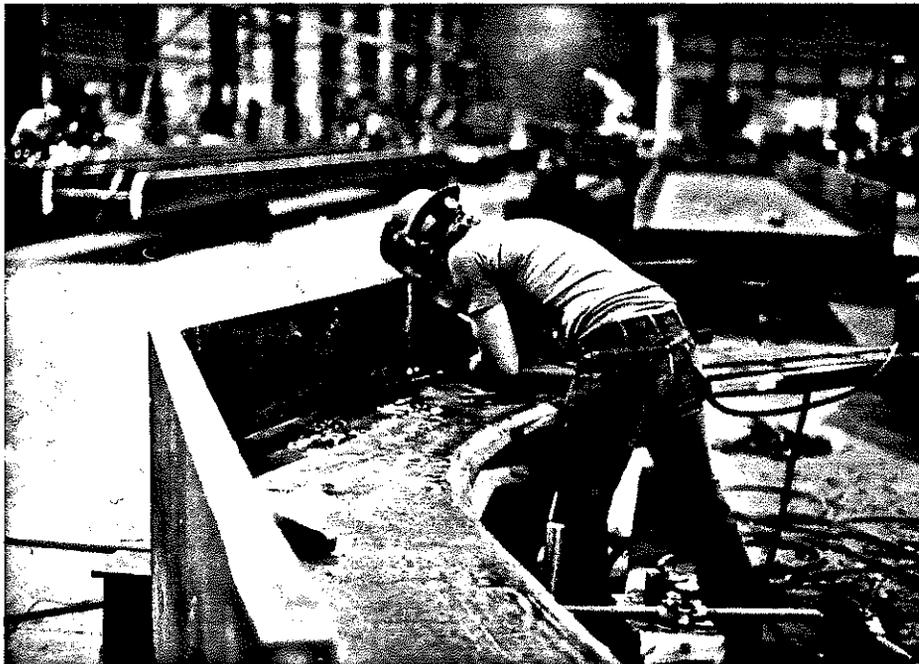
Manual SAW Being Deposited on the Flange-to-Web Corner Welds.
